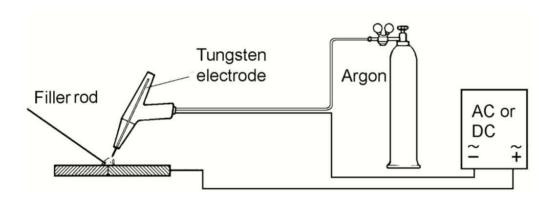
TIG Welding Equipment (Source: Weman, 2012)
